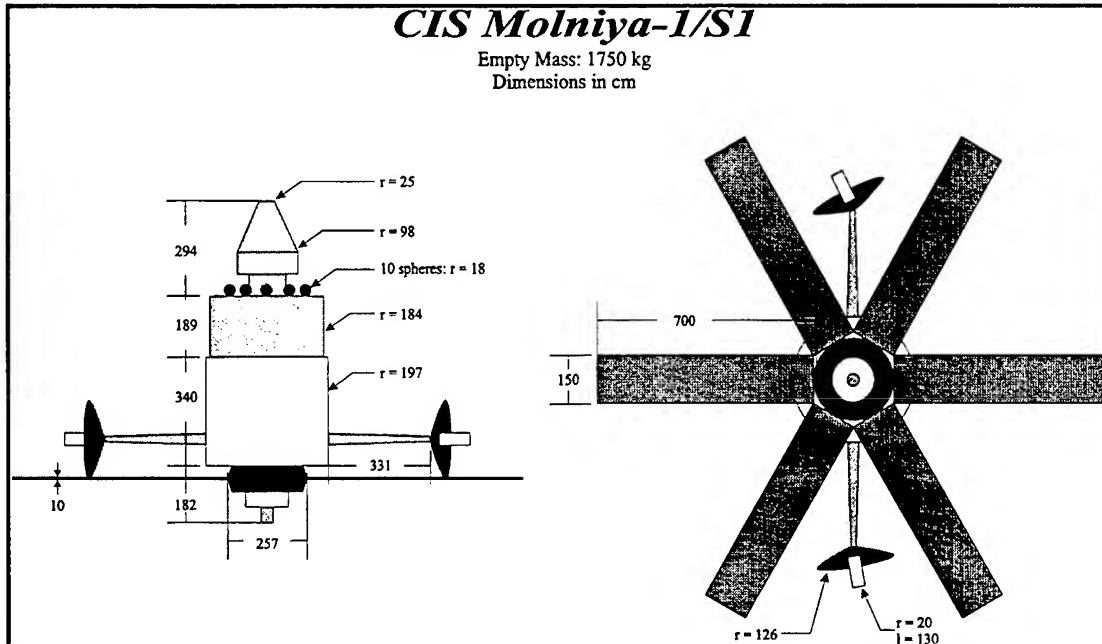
Molniya-1/S1 Technical Drawing [28]
